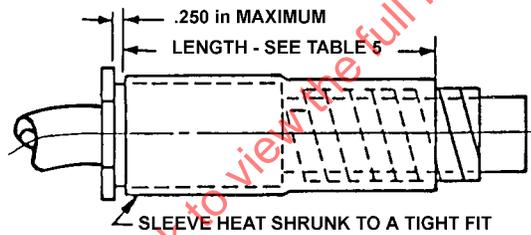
TUBULAR/COIL ABRASION END /9/ /10/
